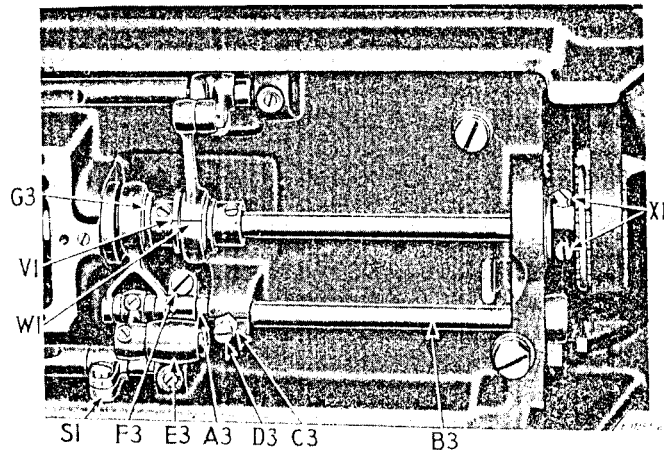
Adjustments on Feed Driving Mechanism of Machine 400w106
